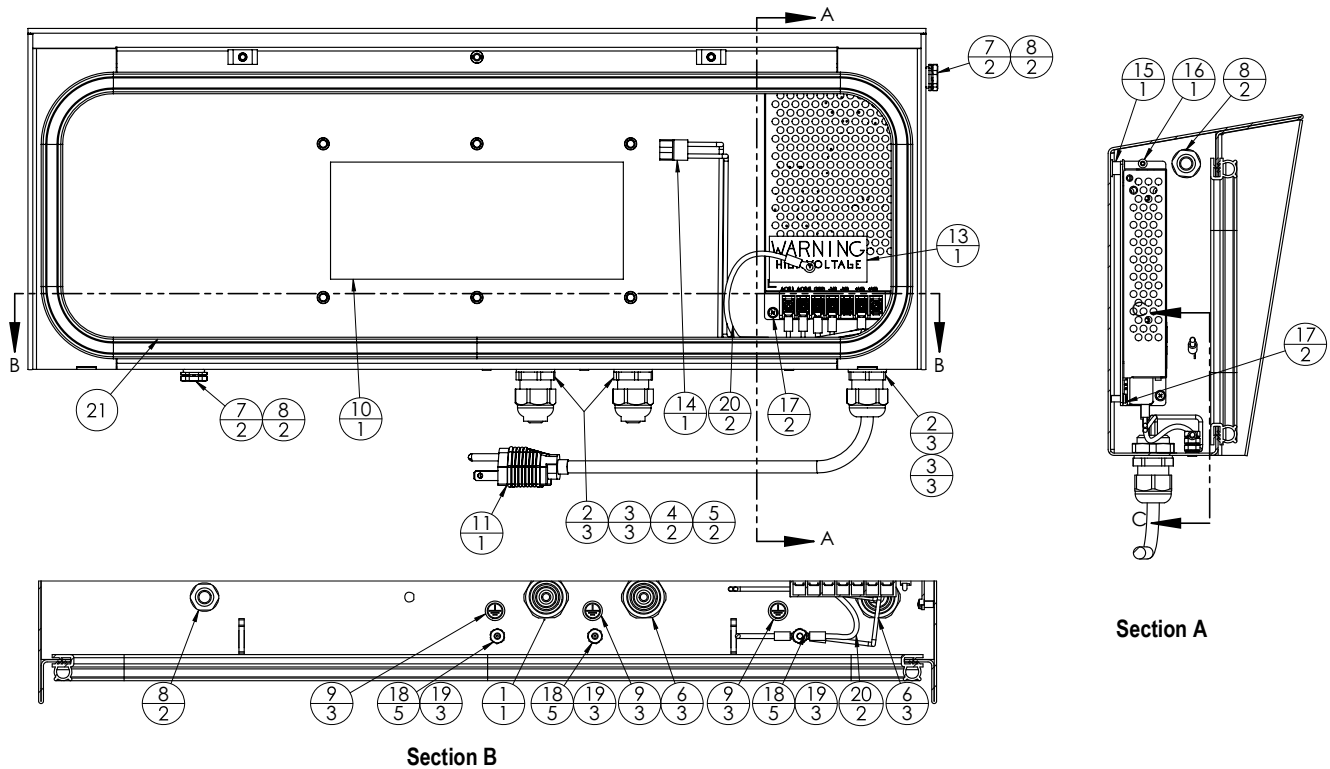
LaserLight3 Cabinet Parts Illustration
